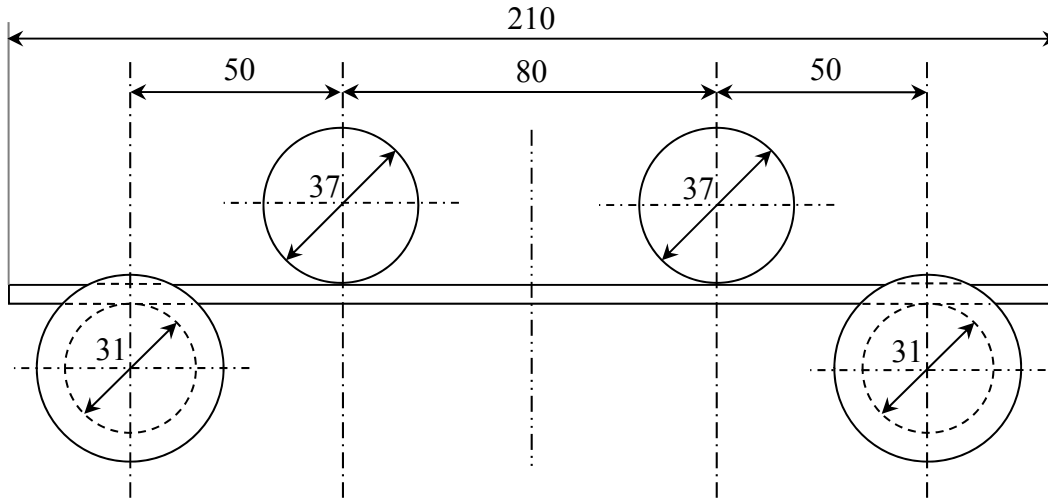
4 point bend jig configuration sketch (dimensions in mm)
